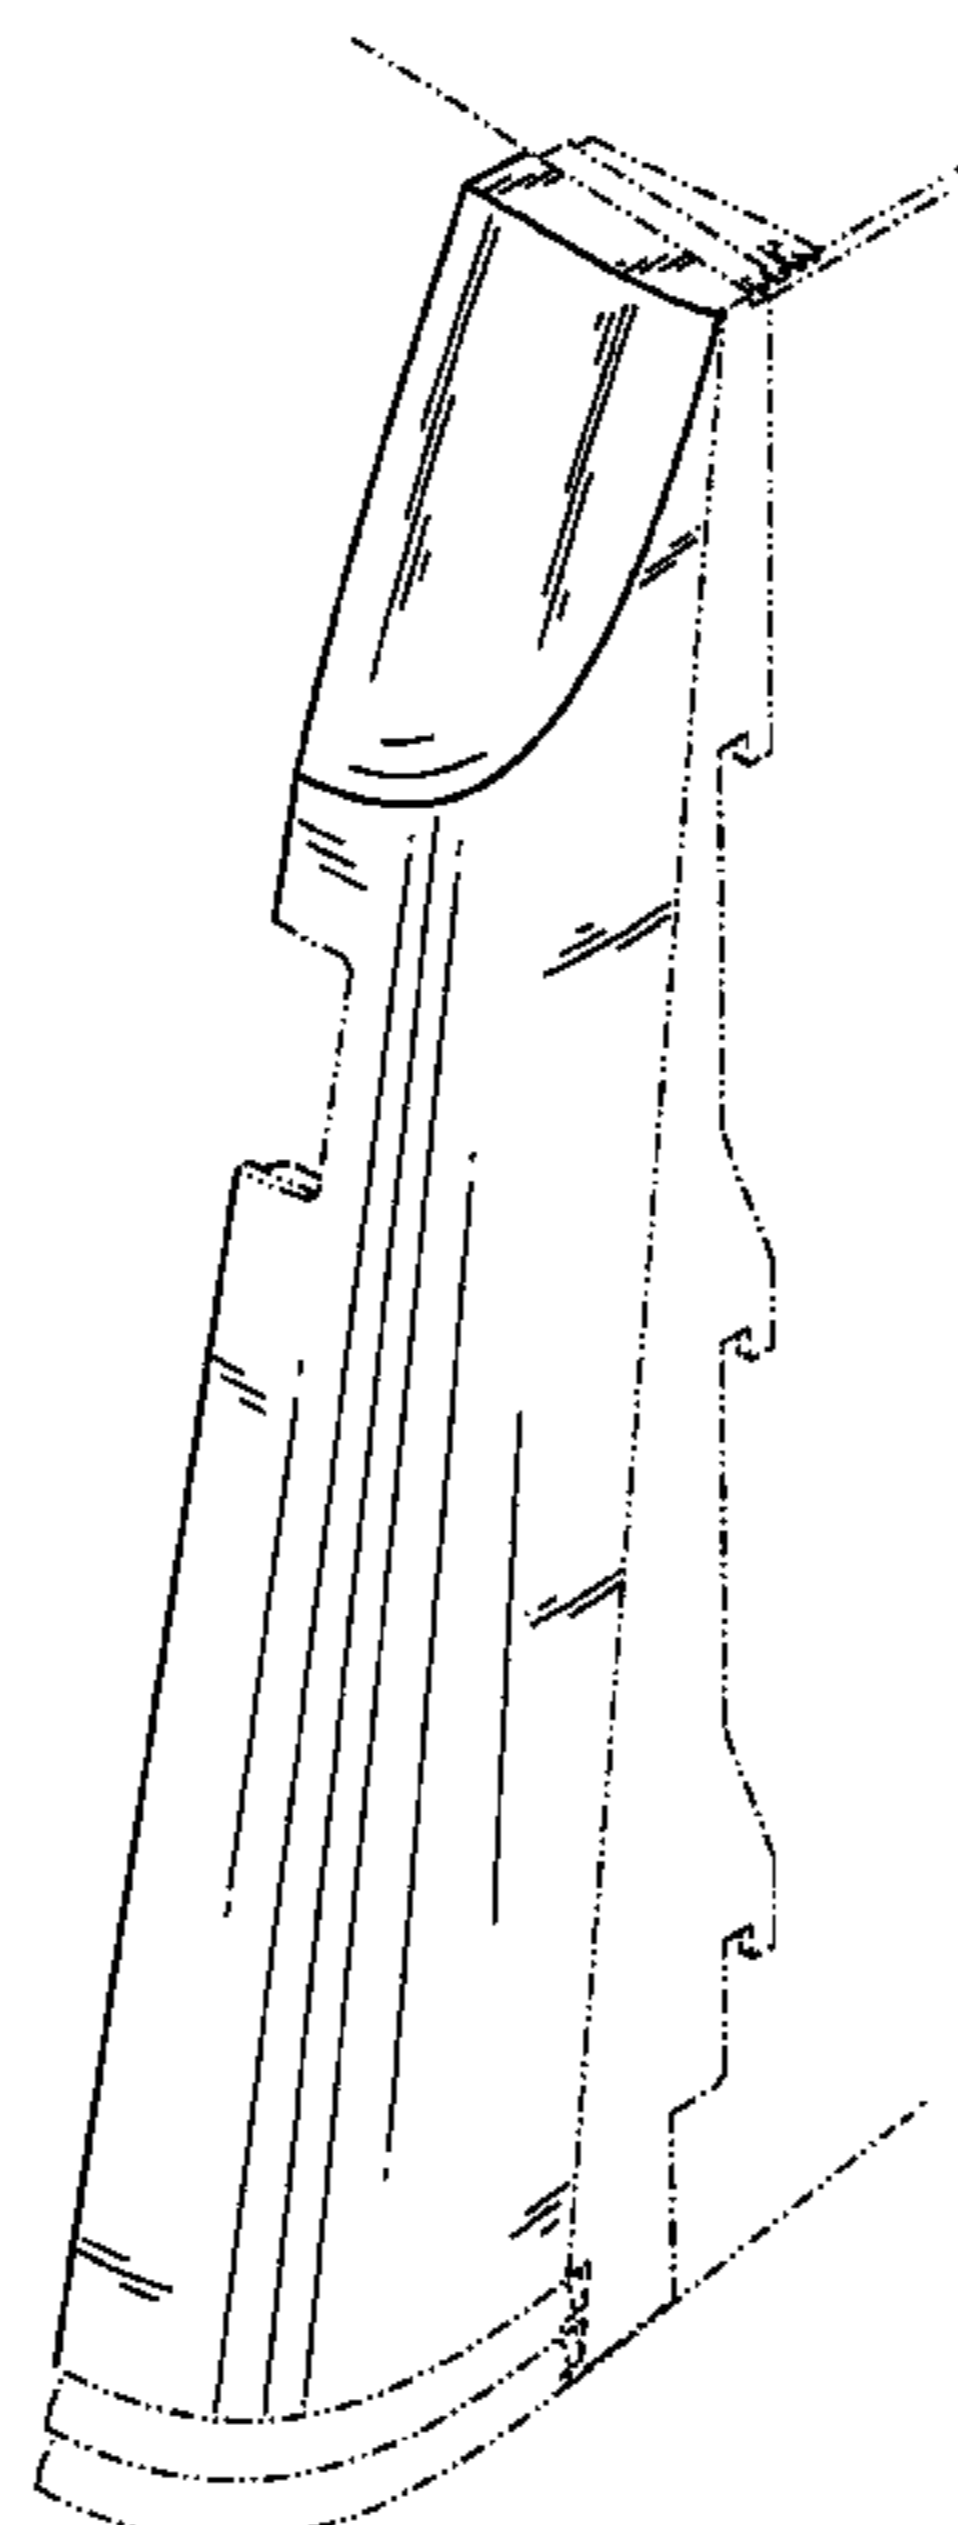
is a left side elevational view of the front cover shown in FIG. 6;
